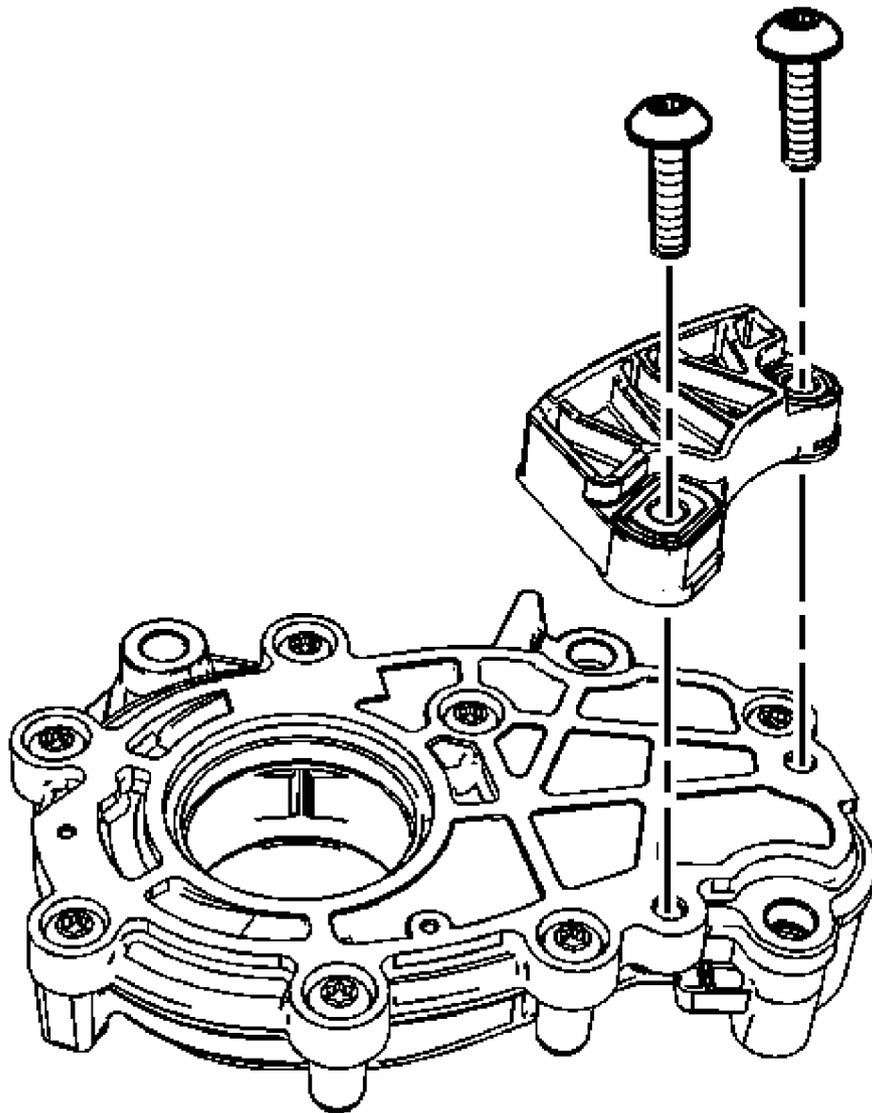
Locating Primary Camshaft Drive Chain Lower Guide Bolts
